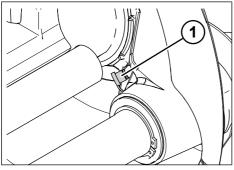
Greasing the brake carrier cam bearing bushing
